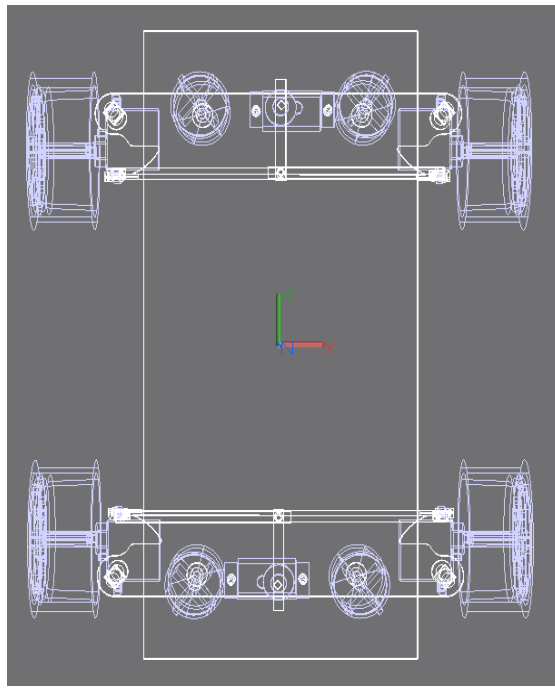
Top View of Mini Rover (CAD & Original)
